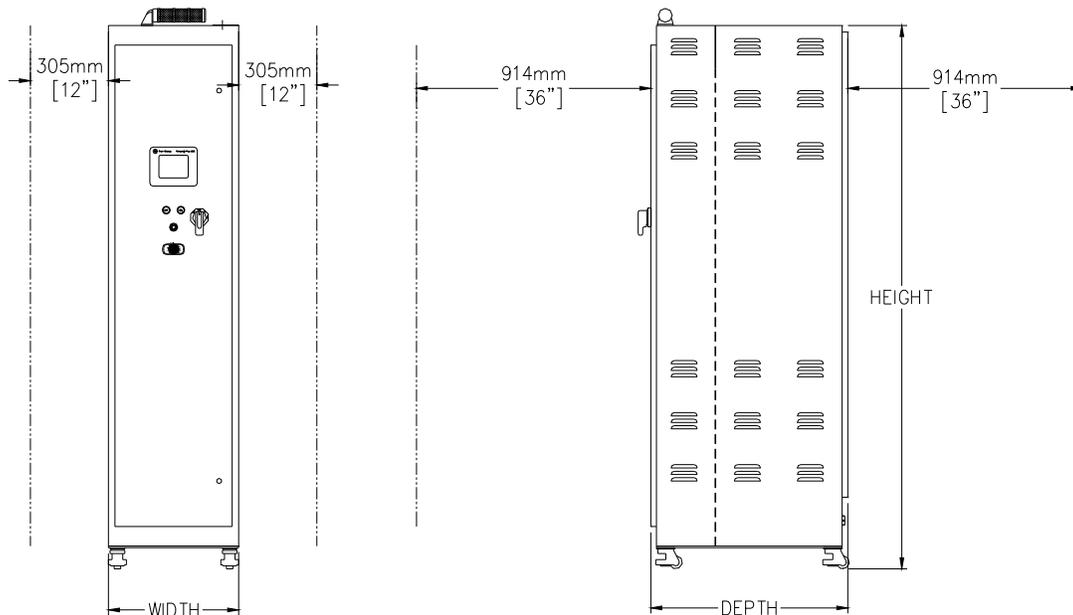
Clearance Dimensions (Single Column 24-72kW Model Shown)
